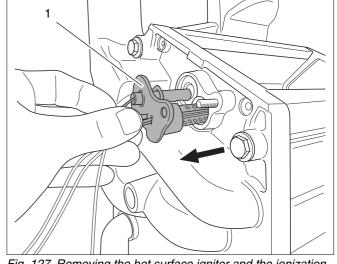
Removing the hot surface ignitor and the ionization electrode
